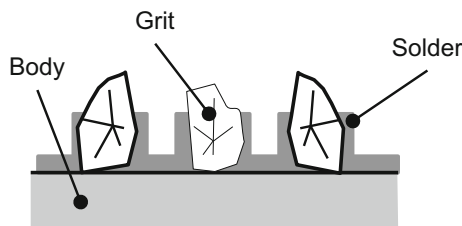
Structure of a brazed layer after [MARI04, p. 416, DING05]
